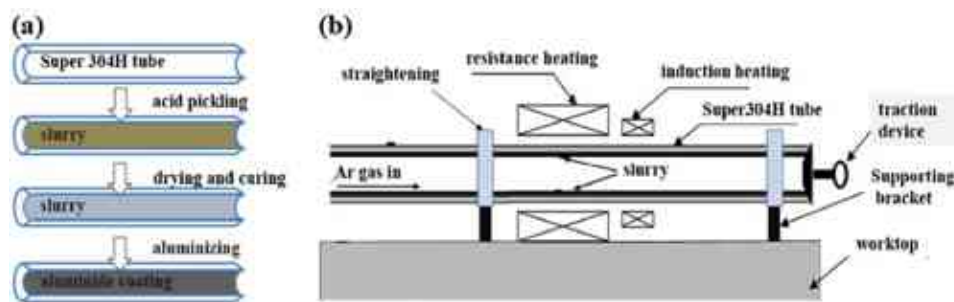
Processing steps for inner surface aluminizing starting with cleaning then coating the inside surface of a super 304H tube (a); and schematic diagram of the coating deposition device (b) [53].
